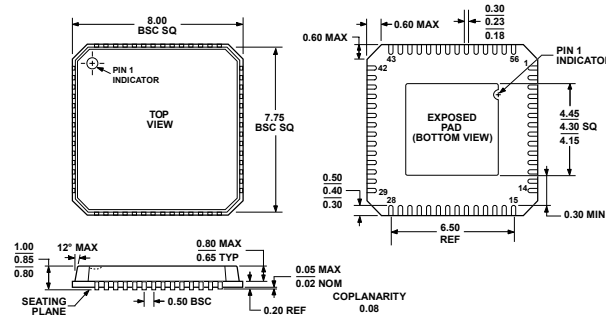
AD9230 dimensions and mechanical tolerance.
